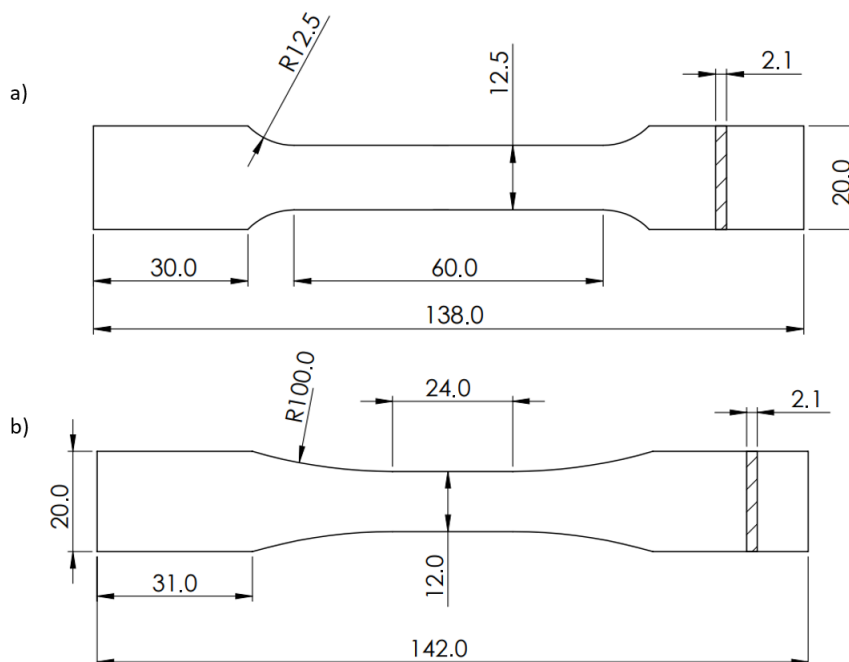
Specimen dimensions: a) tensile; b) fatigue.
